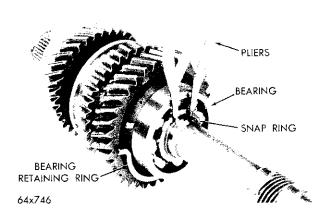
Removing or Installing Center Bearing Snap Ring—Rear
